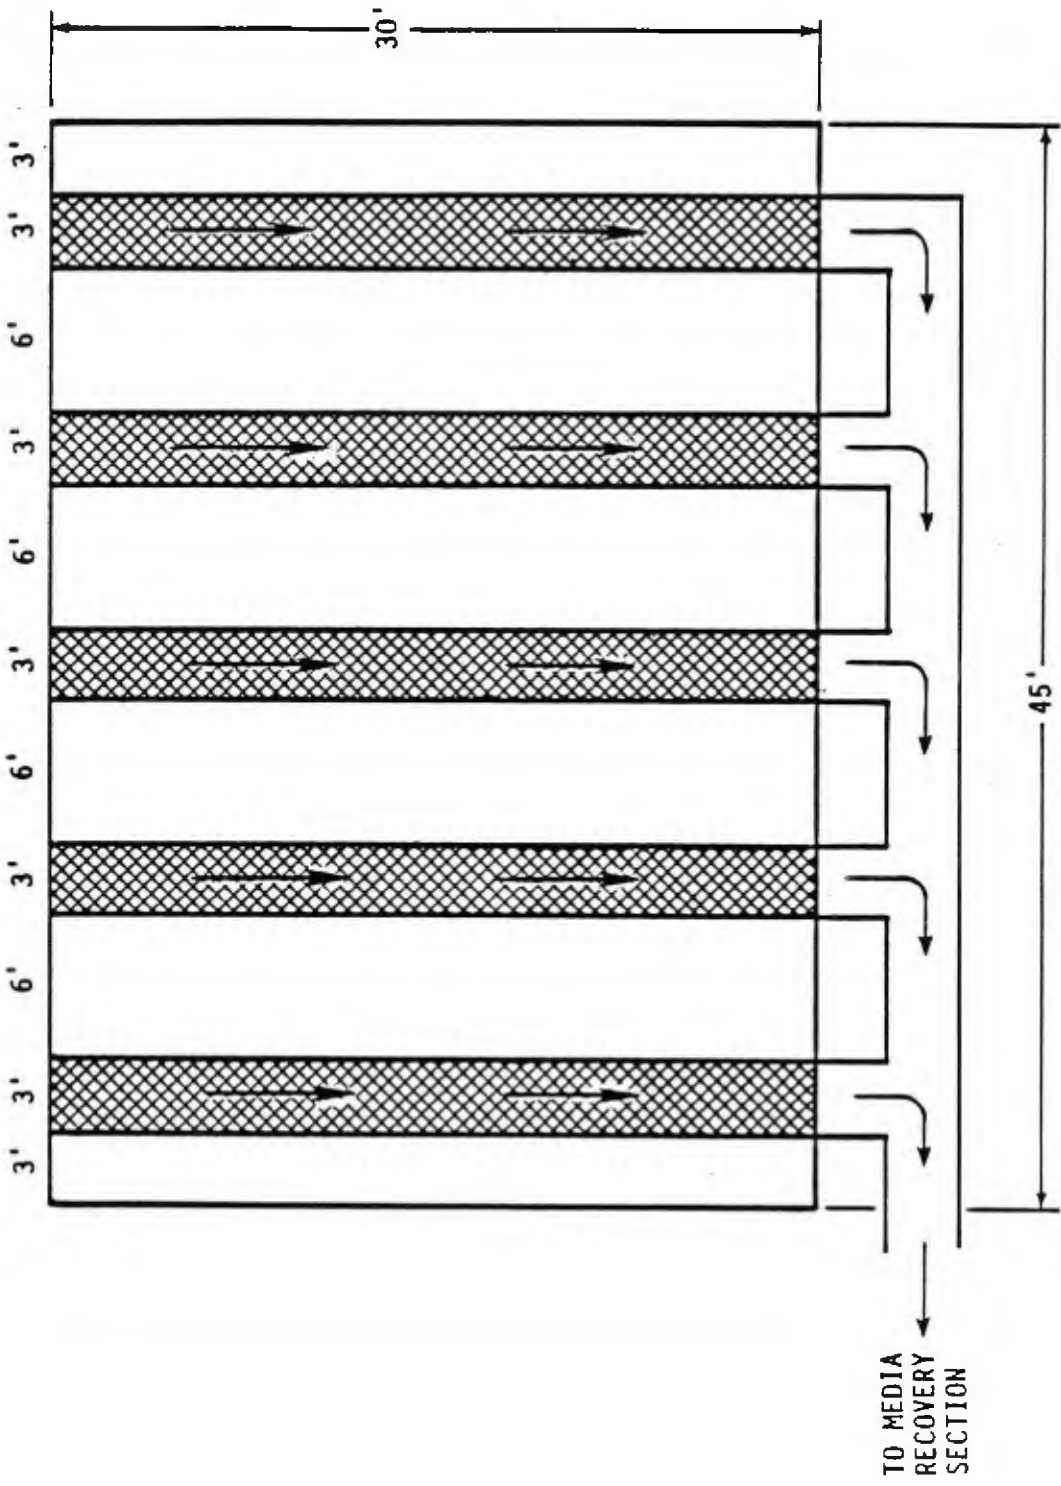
TYPICAL PARTIAL FLOOR RECOVERY LAYOUT.
